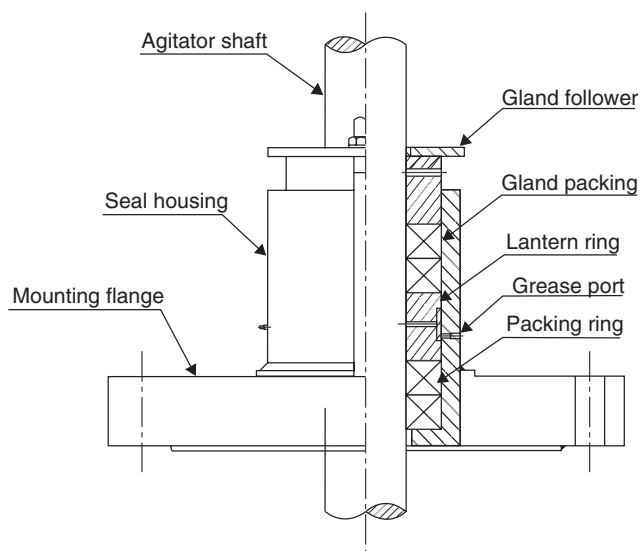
Stuffing box assembly. (Courtesy of Unique Mixers and Furnaces.)
